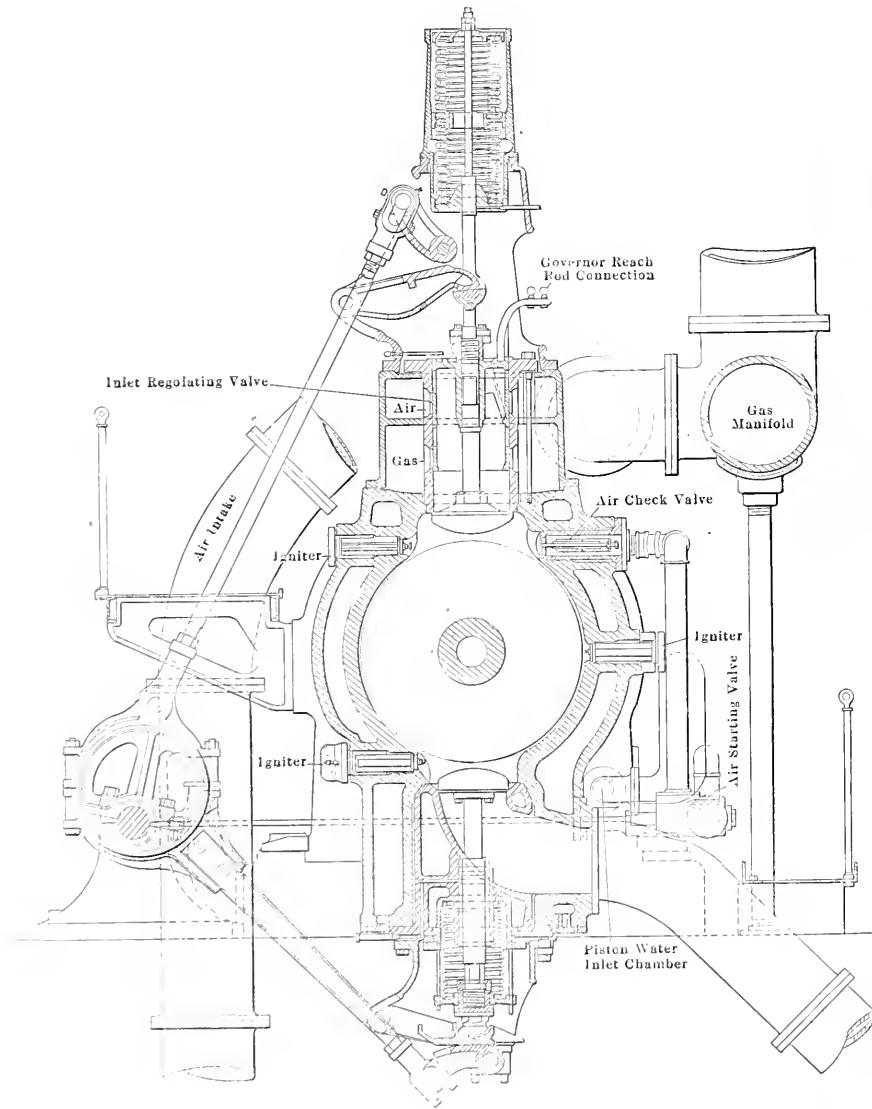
DETAIL CROSS-SECTION OF GAS ENGINE THROUGH VALVE CENTERS
